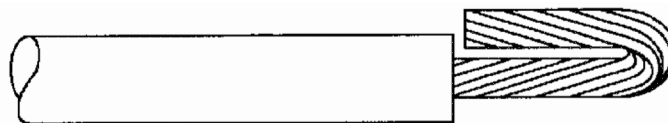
DOUBLE BACK FILLER WIRE METHOD
